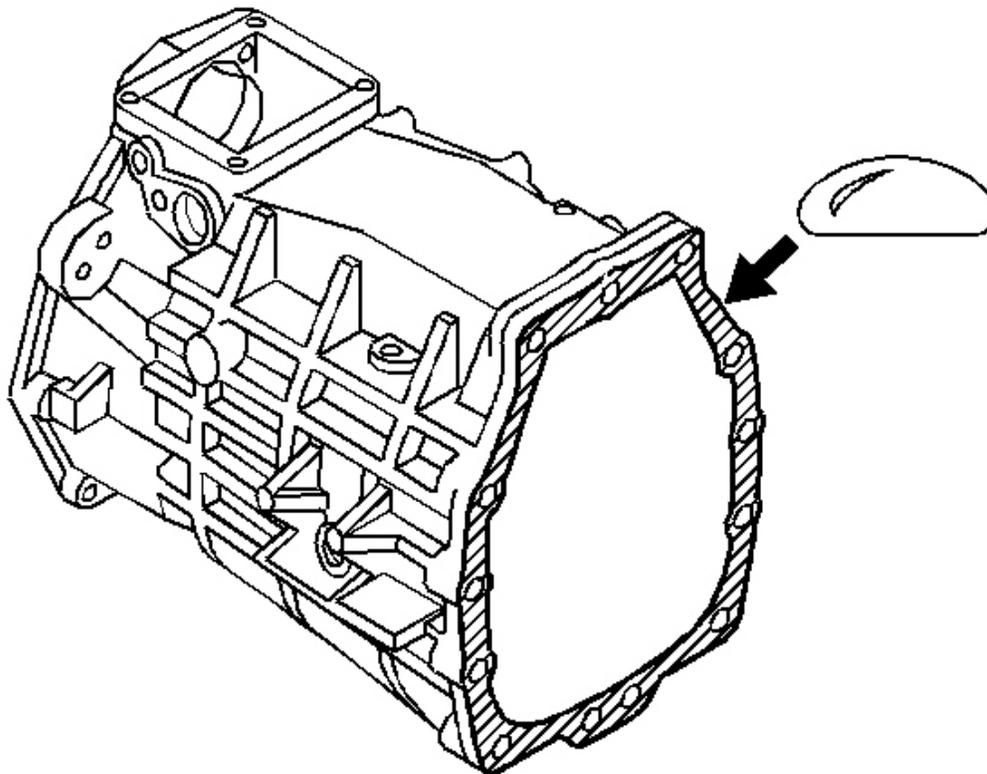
Apply Sealer To Transmission Case To Adapter Plate Mating Surface
